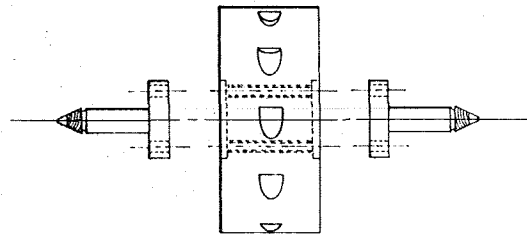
Brass Rotor and Aluminum Shaft Assembly
